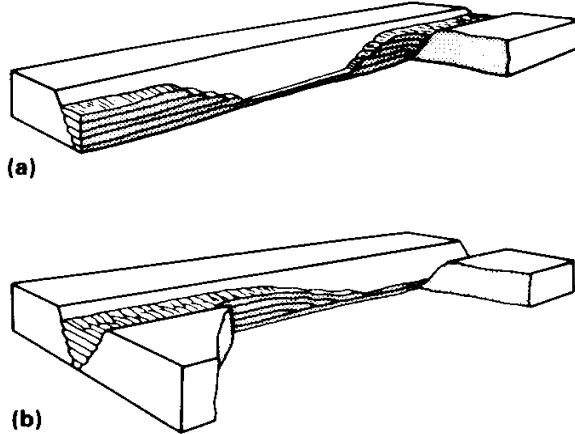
Methods applied to the OFW process to deposit filler metal with minimum weld stress. (a) Block sequence. (b) Cascade sequence
